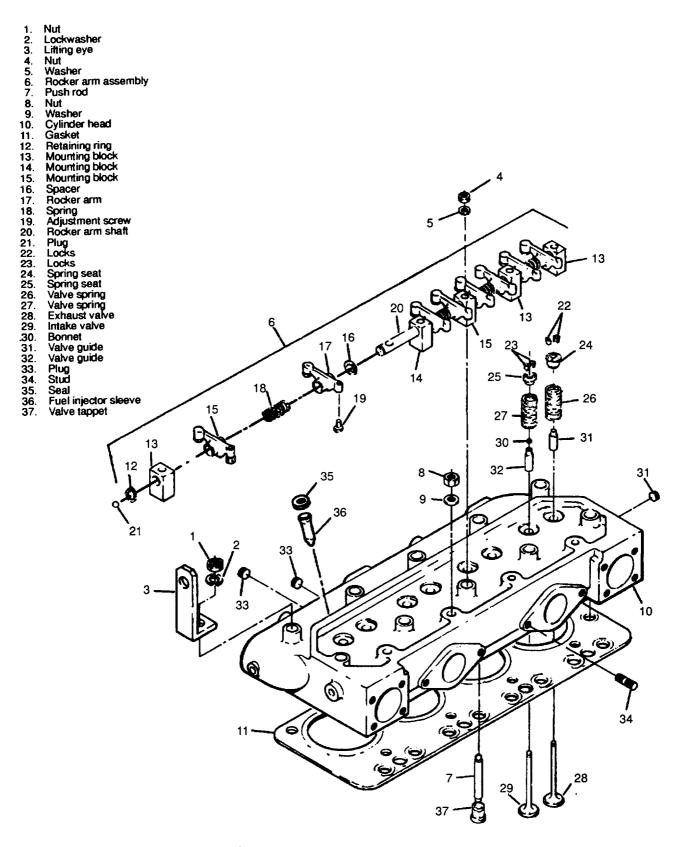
Cylinder Head and Rocker Assembly, Exploded View
